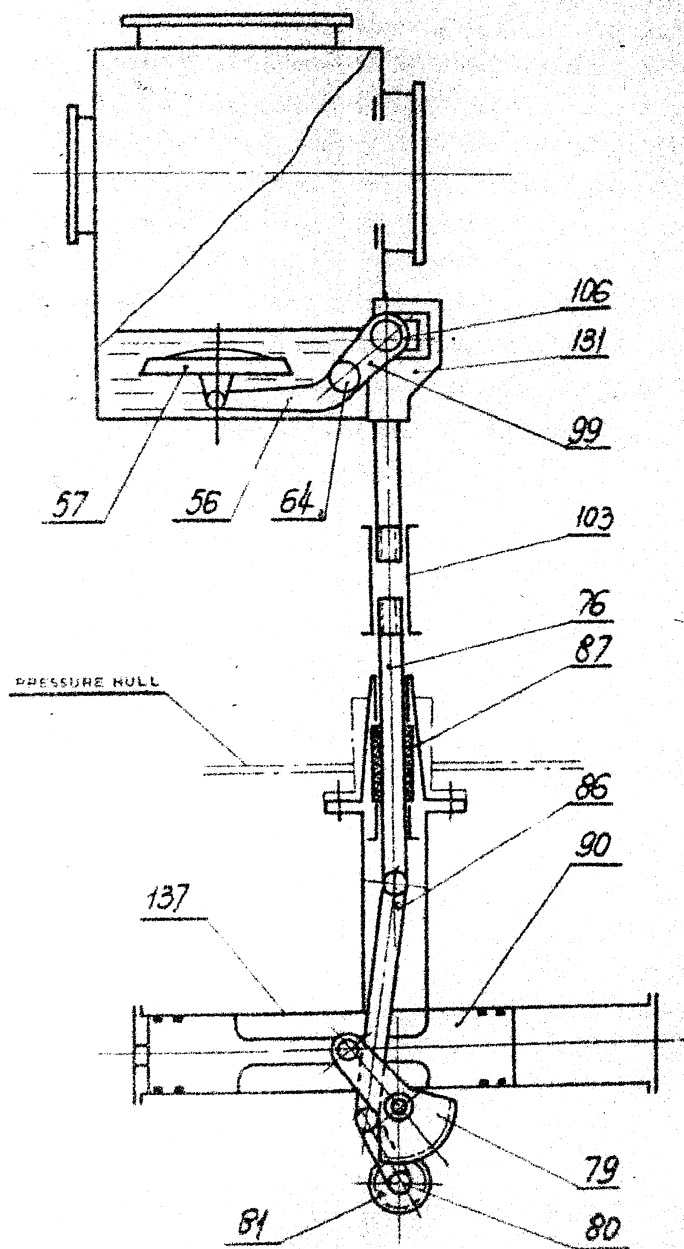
CONTROL GEARING MECHANISM OF SHORT EXHAUST SYSTEM
